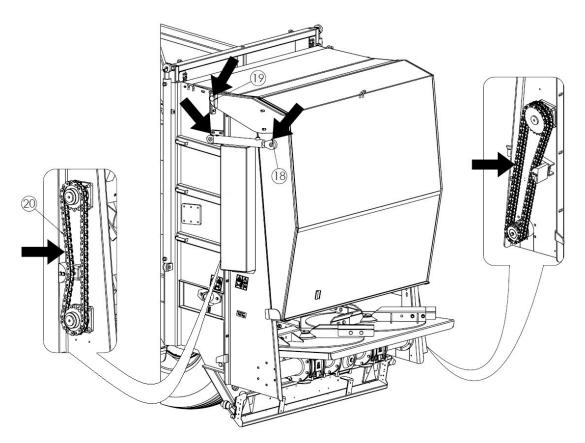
The spreader lubrication points (The 2-auger horizontal-disc beater unit)
